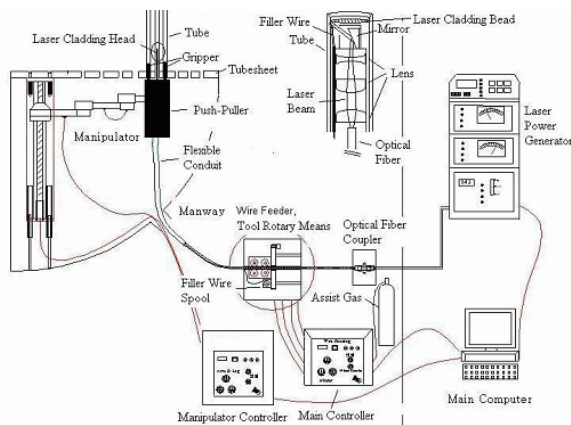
Laser cladding repair system for steam generator damaged tubes
